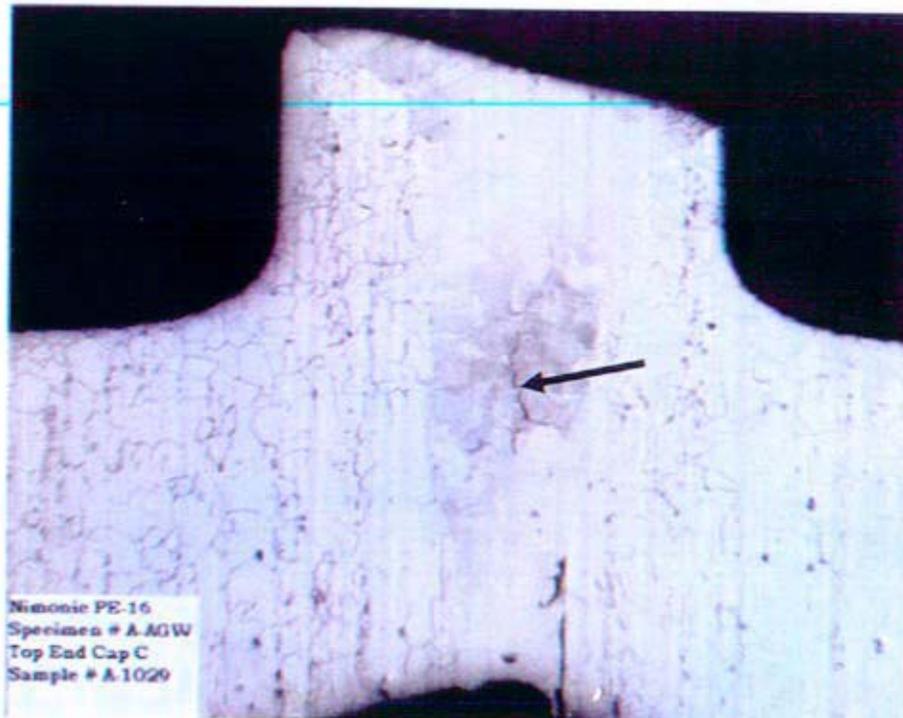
Cracking in Nimonic PE-16 laser weld (70x)
